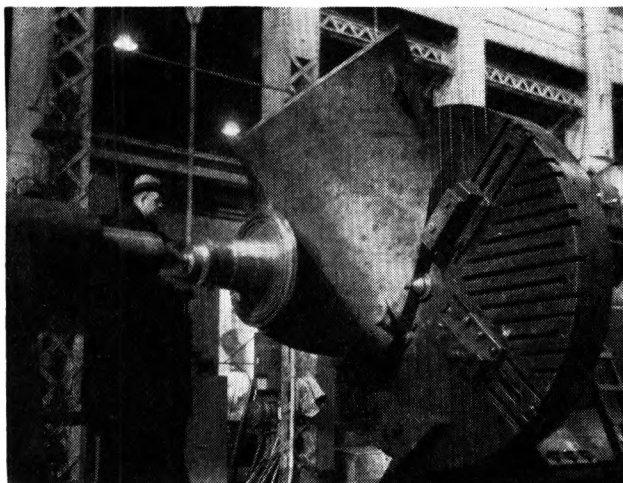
BLADE FOR 14-FT 9-IN. MARMET RUNNER
